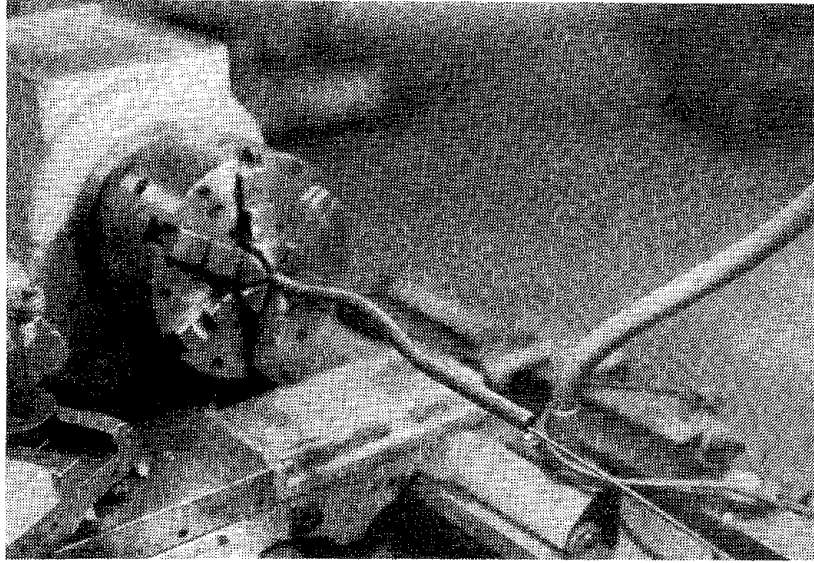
PHOTOGRAPH ILLUSTRATING STRAIGHTENING PROCESS FOR ANNEALED WIRE USING A LATHE AND A BENT TUBE.
